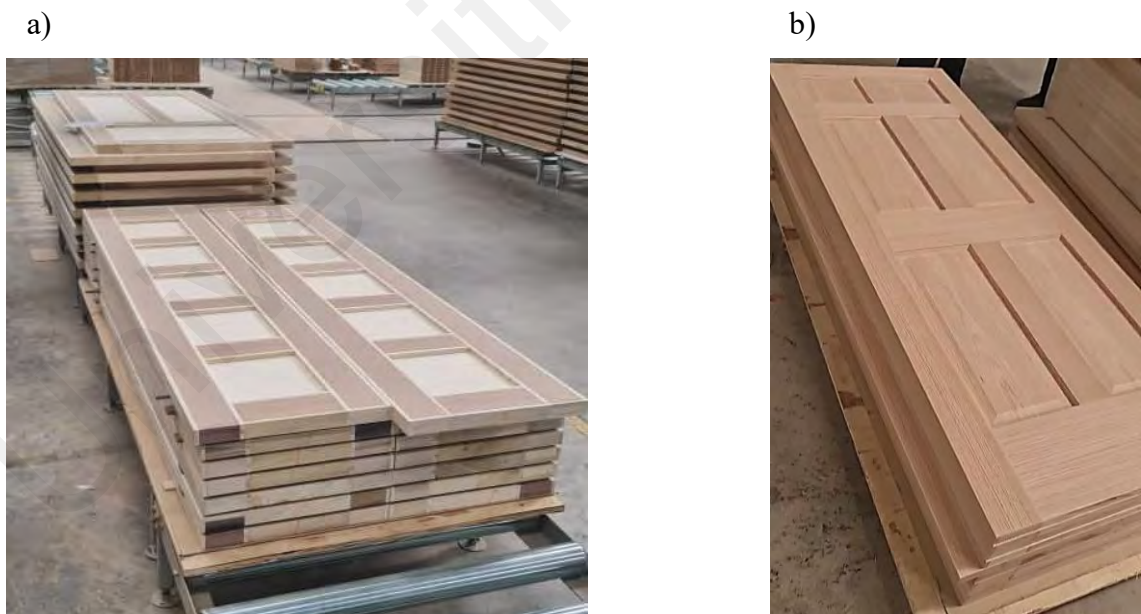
Engineered doors a) before veneer lamination and b) after veneer lamination on the stiles and rails.
